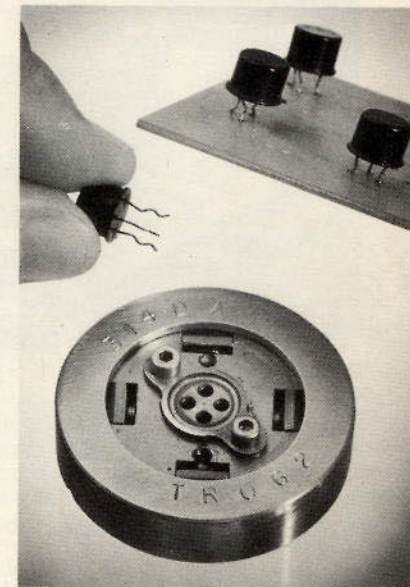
Cutting and forming die for transistor leads, manual method (Hewlett-Packard Co.).
